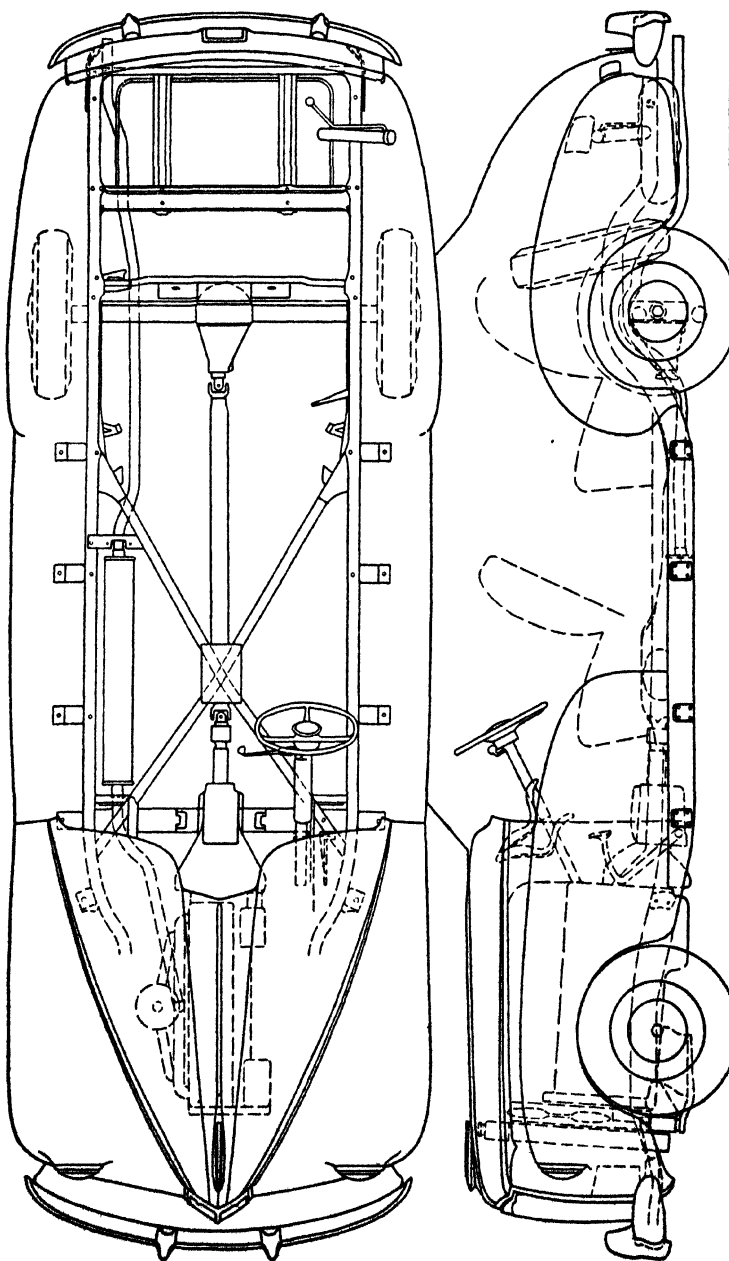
PLAN AND SIDE ELEVATION OF PACKARD ONE-TWENTY CHASSIS (120-IN. WHEELBASE).
